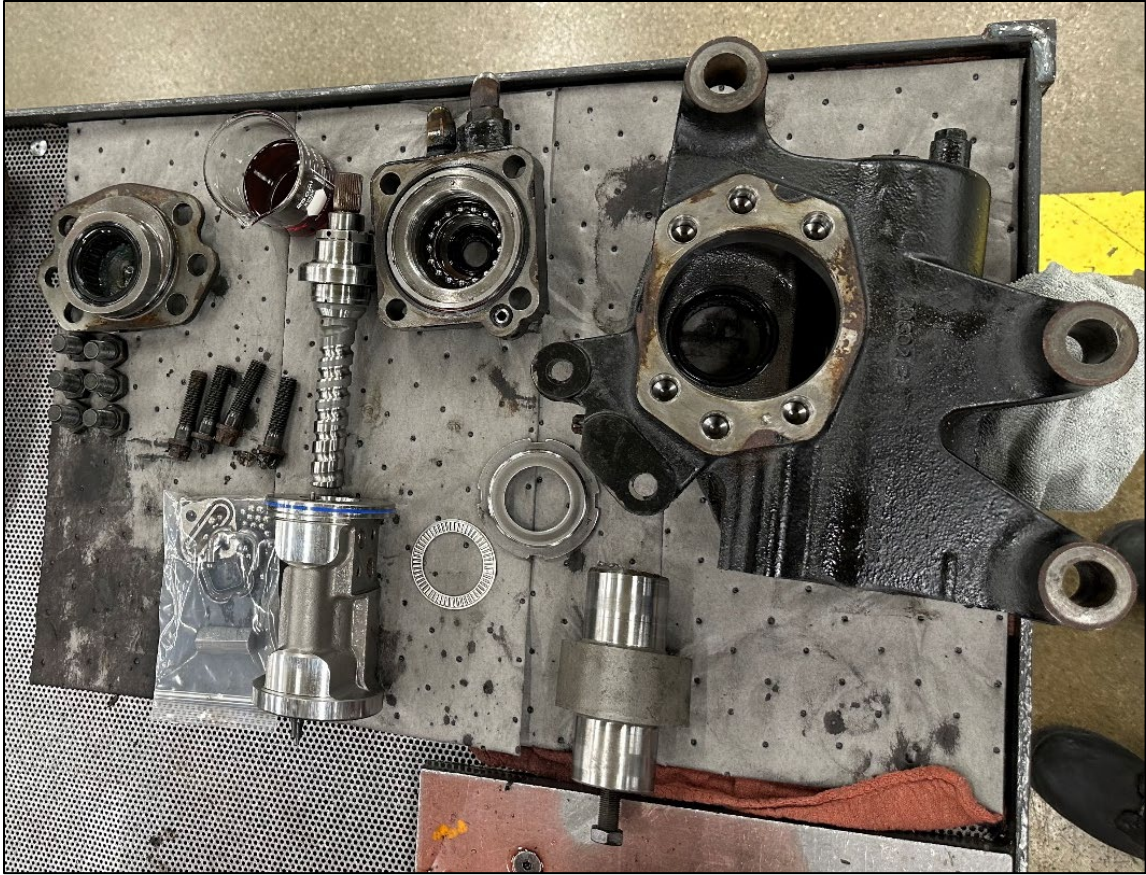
Truck - Disassembled Steering Gearbox Internal Components
